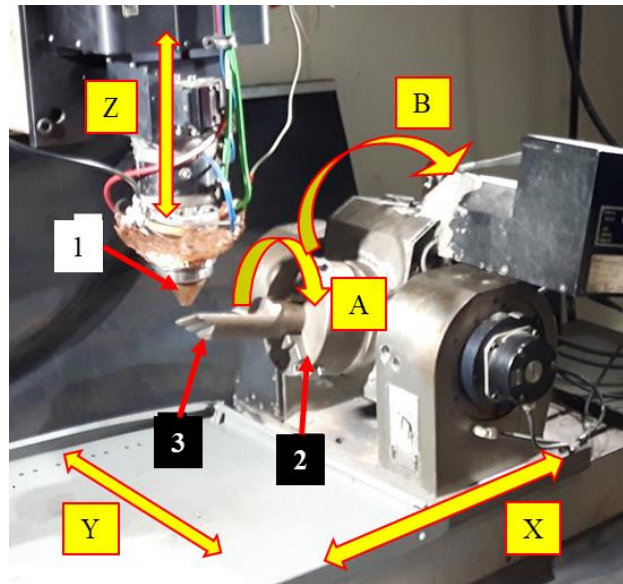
Utilized DED machine to manufacture samples (1) nozzle (2) chuck (3) installed substrate
